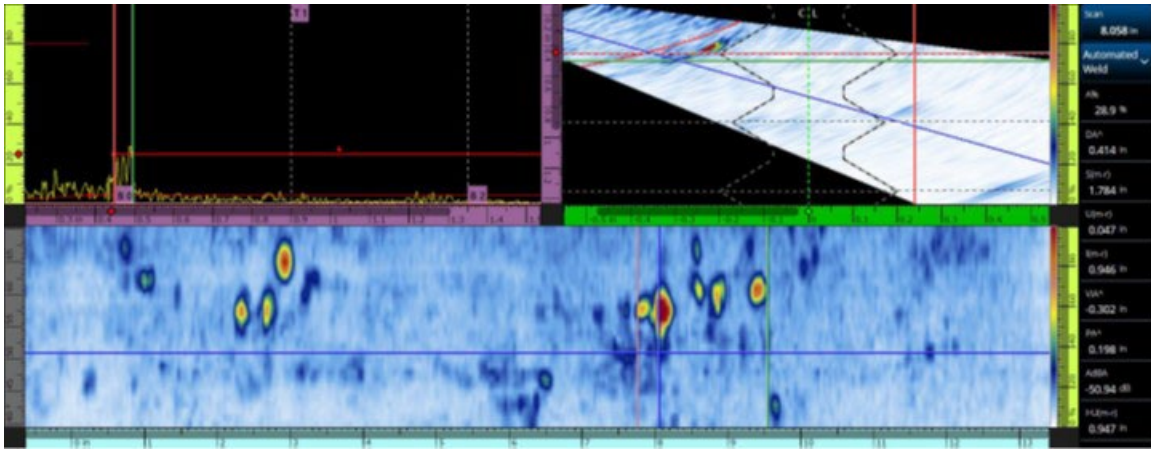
PAUT indication of defect at Location B in fillet weld test panel MGL-9 from ID-raster scan
